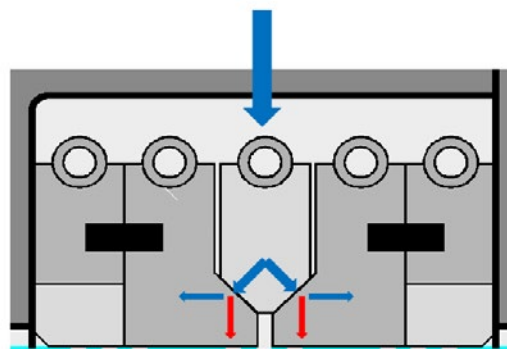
Wedge ring design for buffer chamber, showing the friction forces
